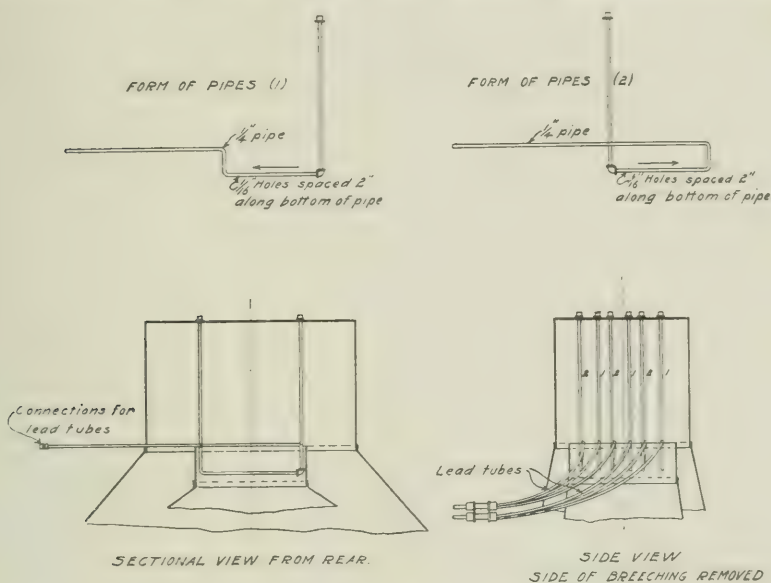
IMPROVED FORM OF GAS SAMPLING TUBES
